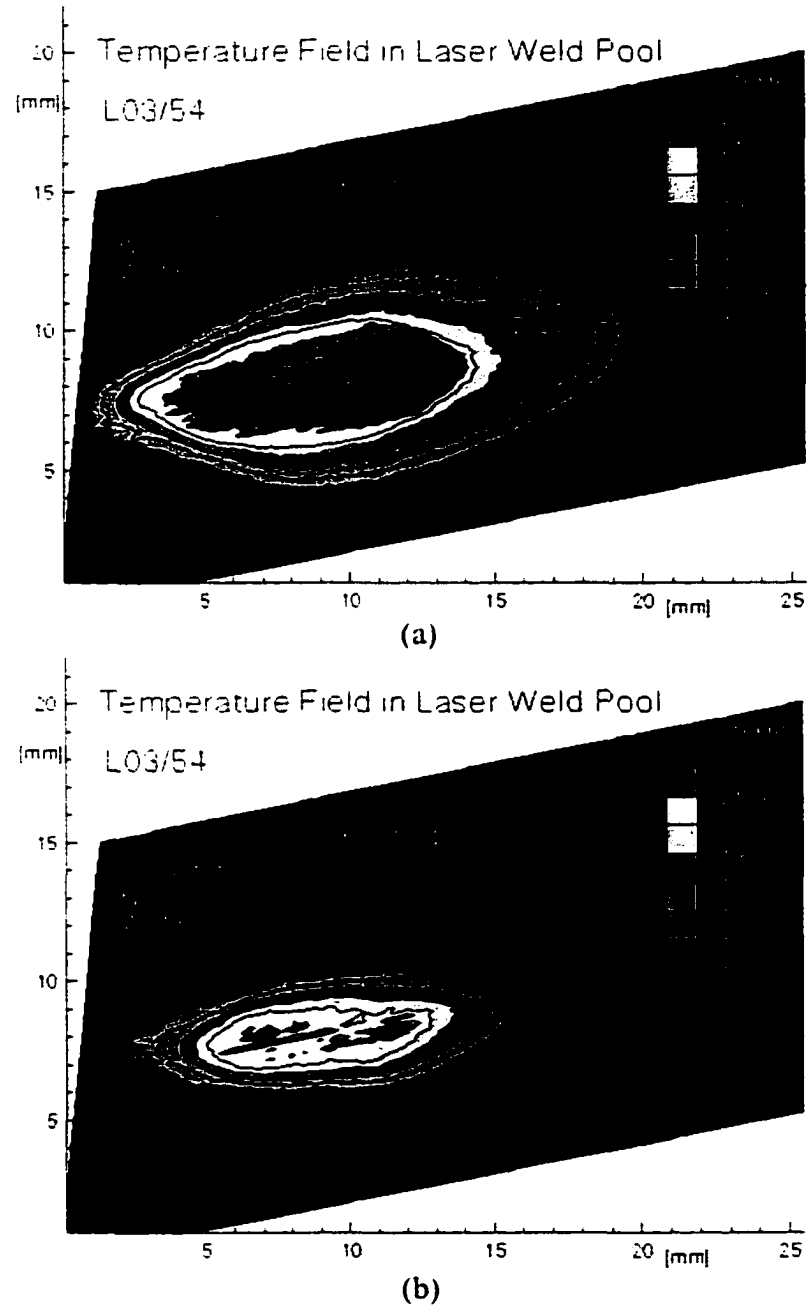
Infrared camera images of surface temperature of the weld pool. Laser welding, St 52 steel, (a) power = 4800 W, (b) power = 3200 W.²⁶
